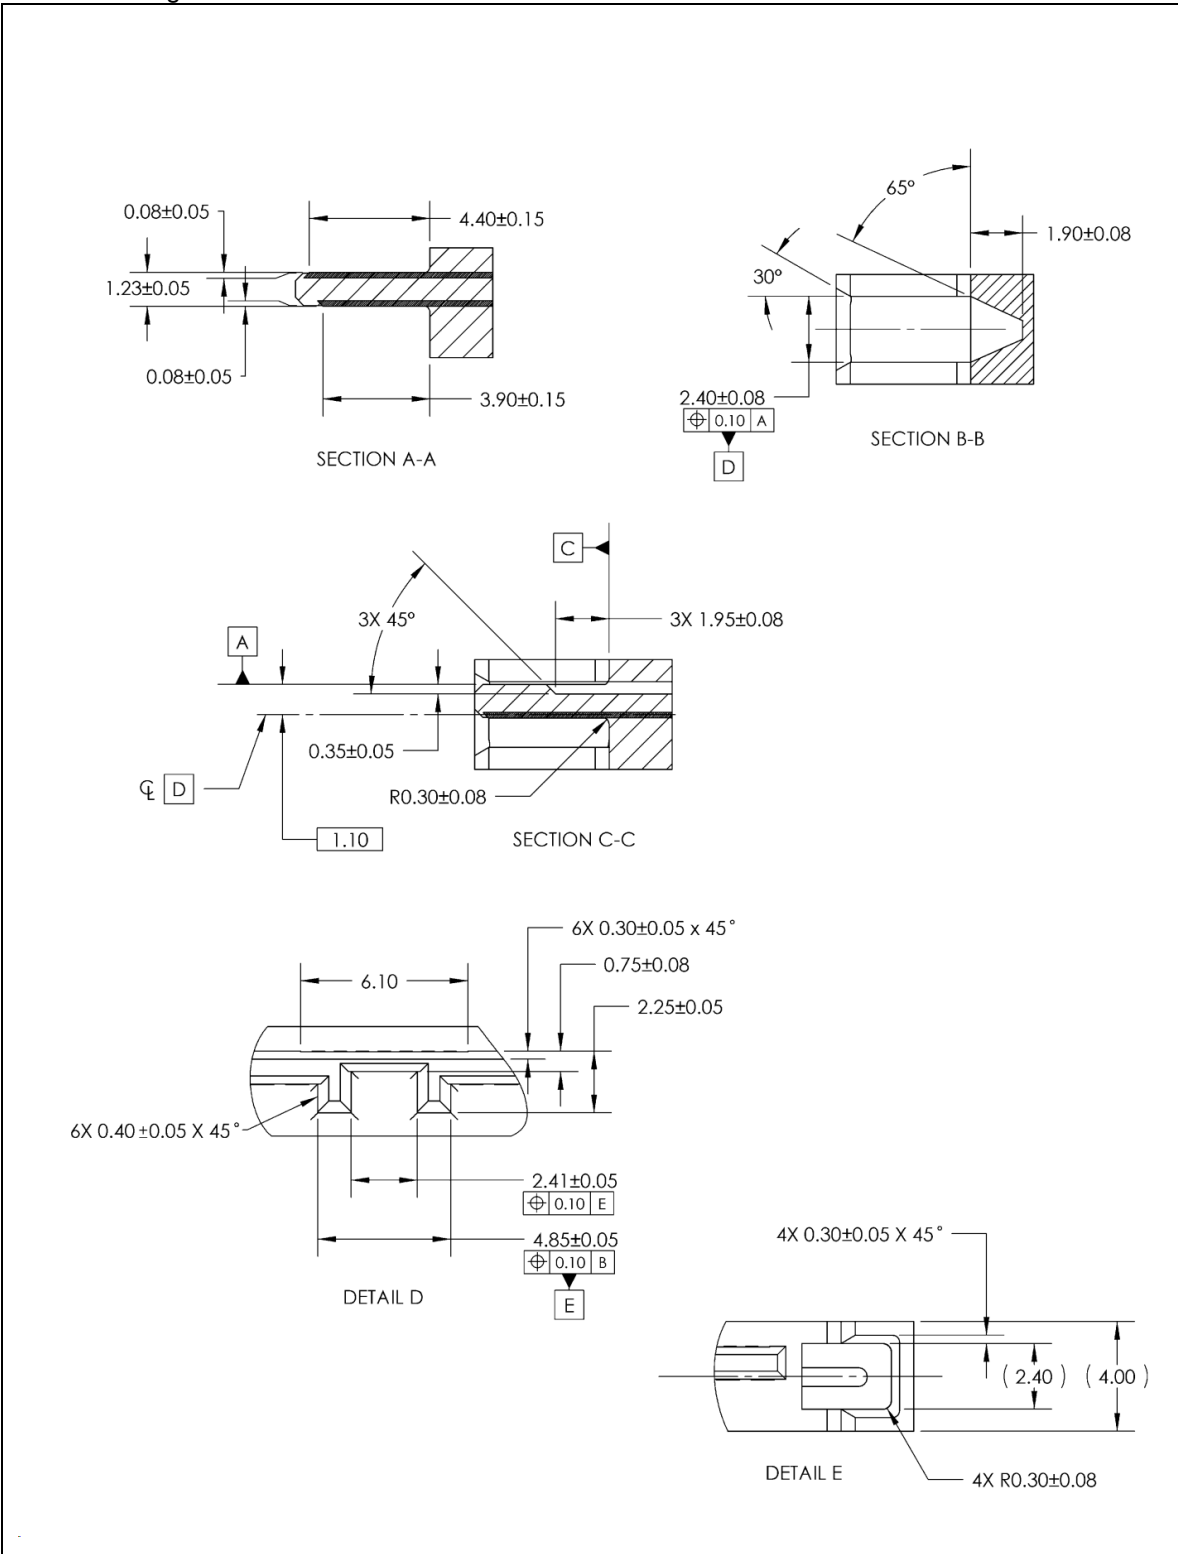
SATA Express device plug connector drawing (part 2 of 2)
